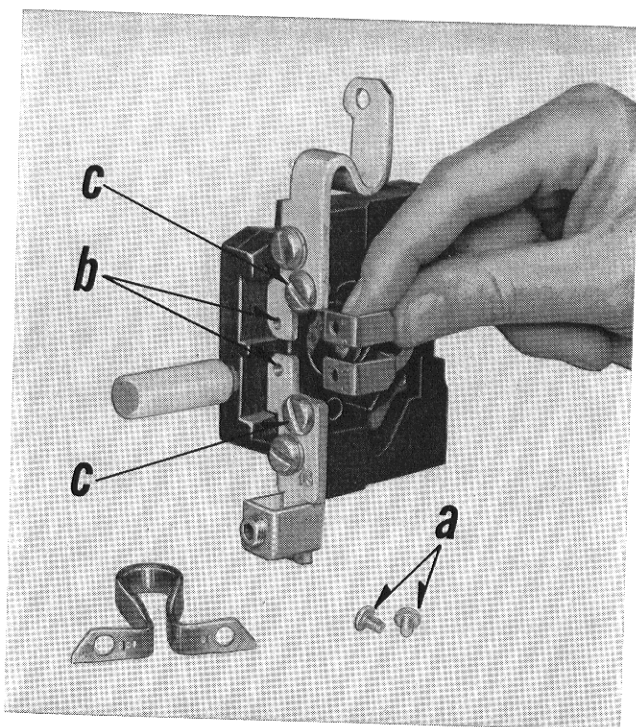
Install "B" code heater in the relay, using screws "a" threaded into holes "b". The "C" code heater (shown below relay) is held by larger screws "c". Be sure the looped portion enters the recess in the relay.
